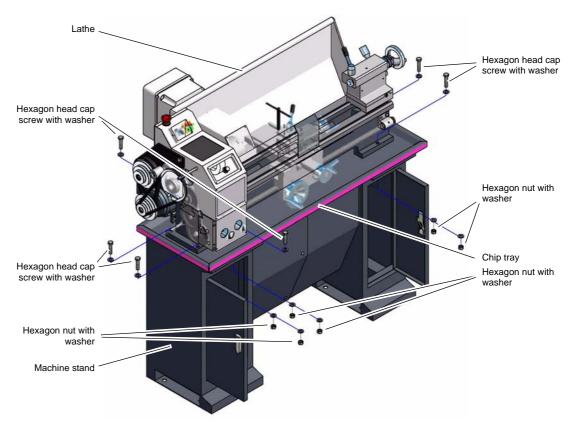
Assembly scheme of the lathe on the machine stand
